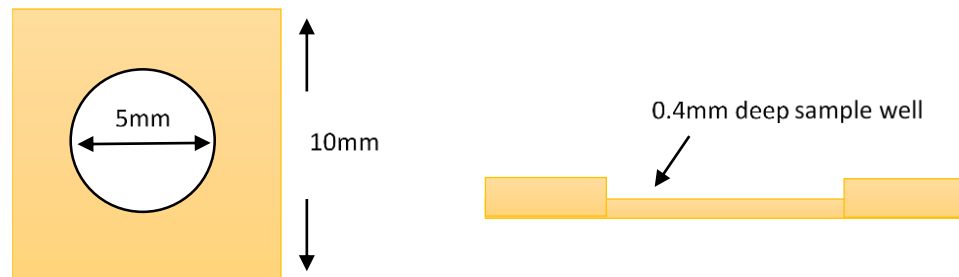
a) Top view of the sample holder. 10mm square with 5mm diameter well. b) Side view of sample holder. 0.8 mm height with 0.4 mm deep well in center.
